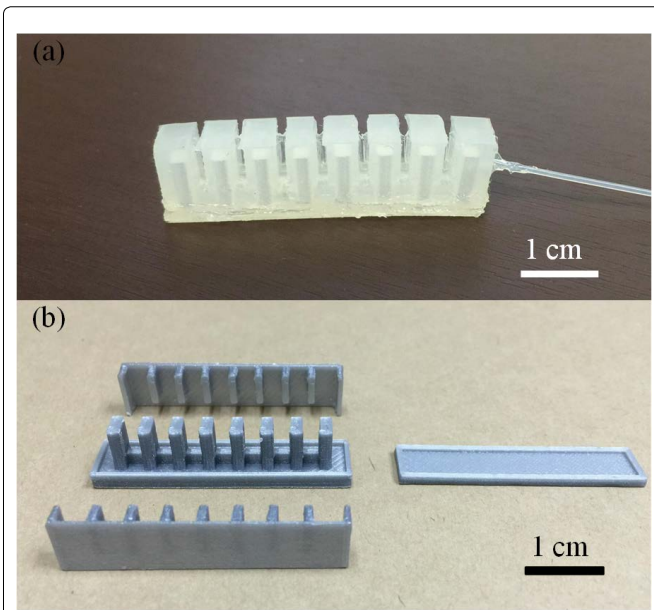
a) A small inchworm robot; b) 3D printed molds for fabrication.
